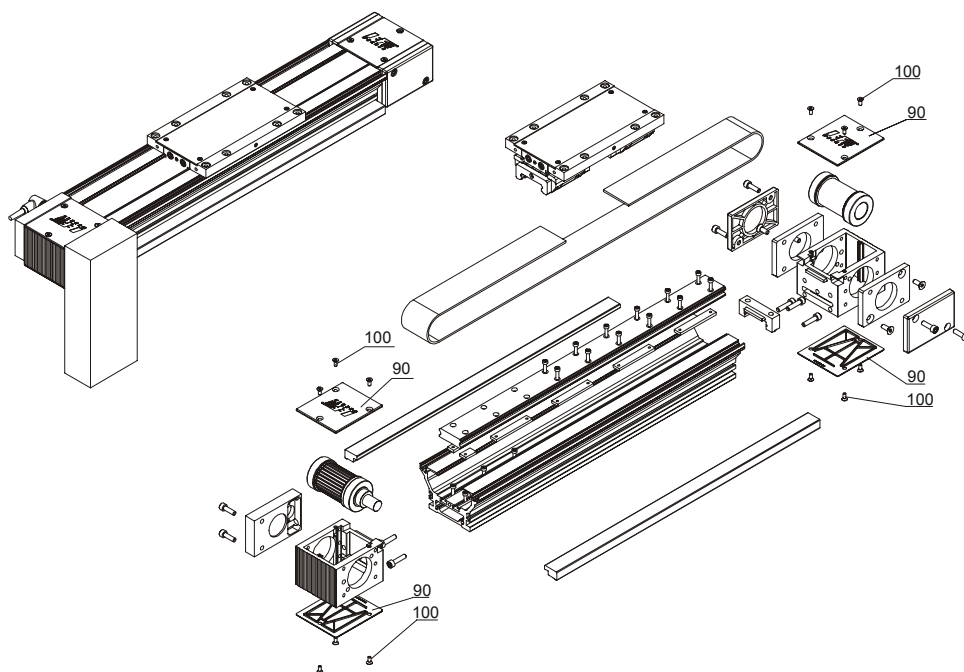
Module 115/42 Installation Variant 1, Exploded View
